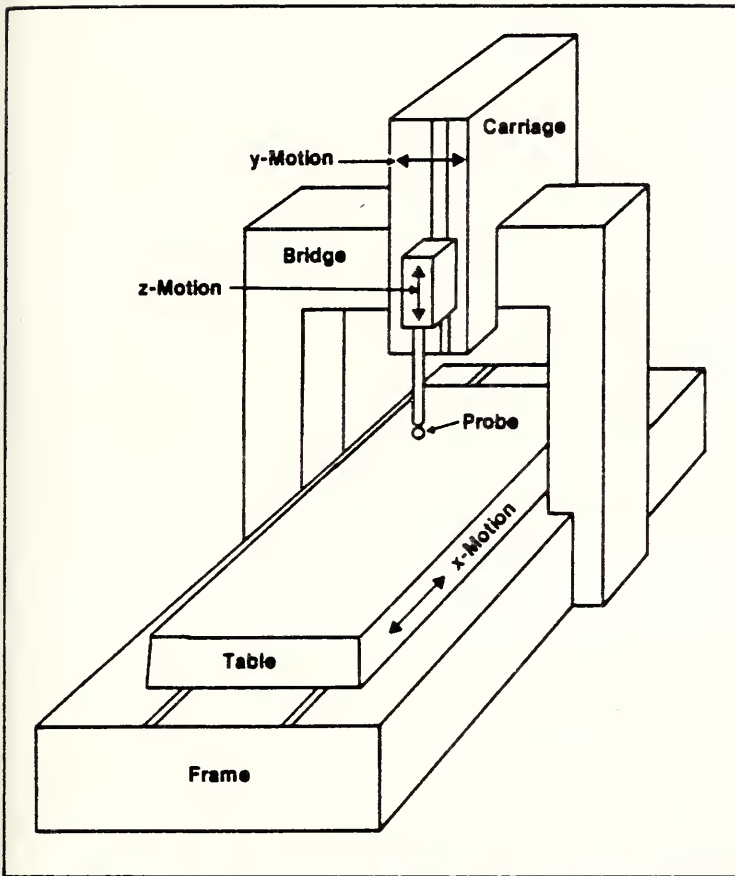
Schematic diagram showing the geometry of the Moore 5Z coordinate measuring machine.
